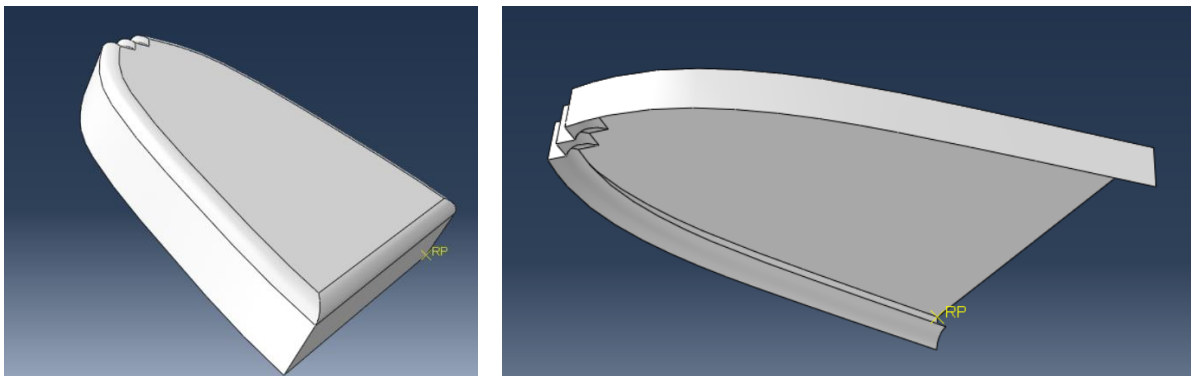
The 3D model of the Punch and die to form the peripheral edges
